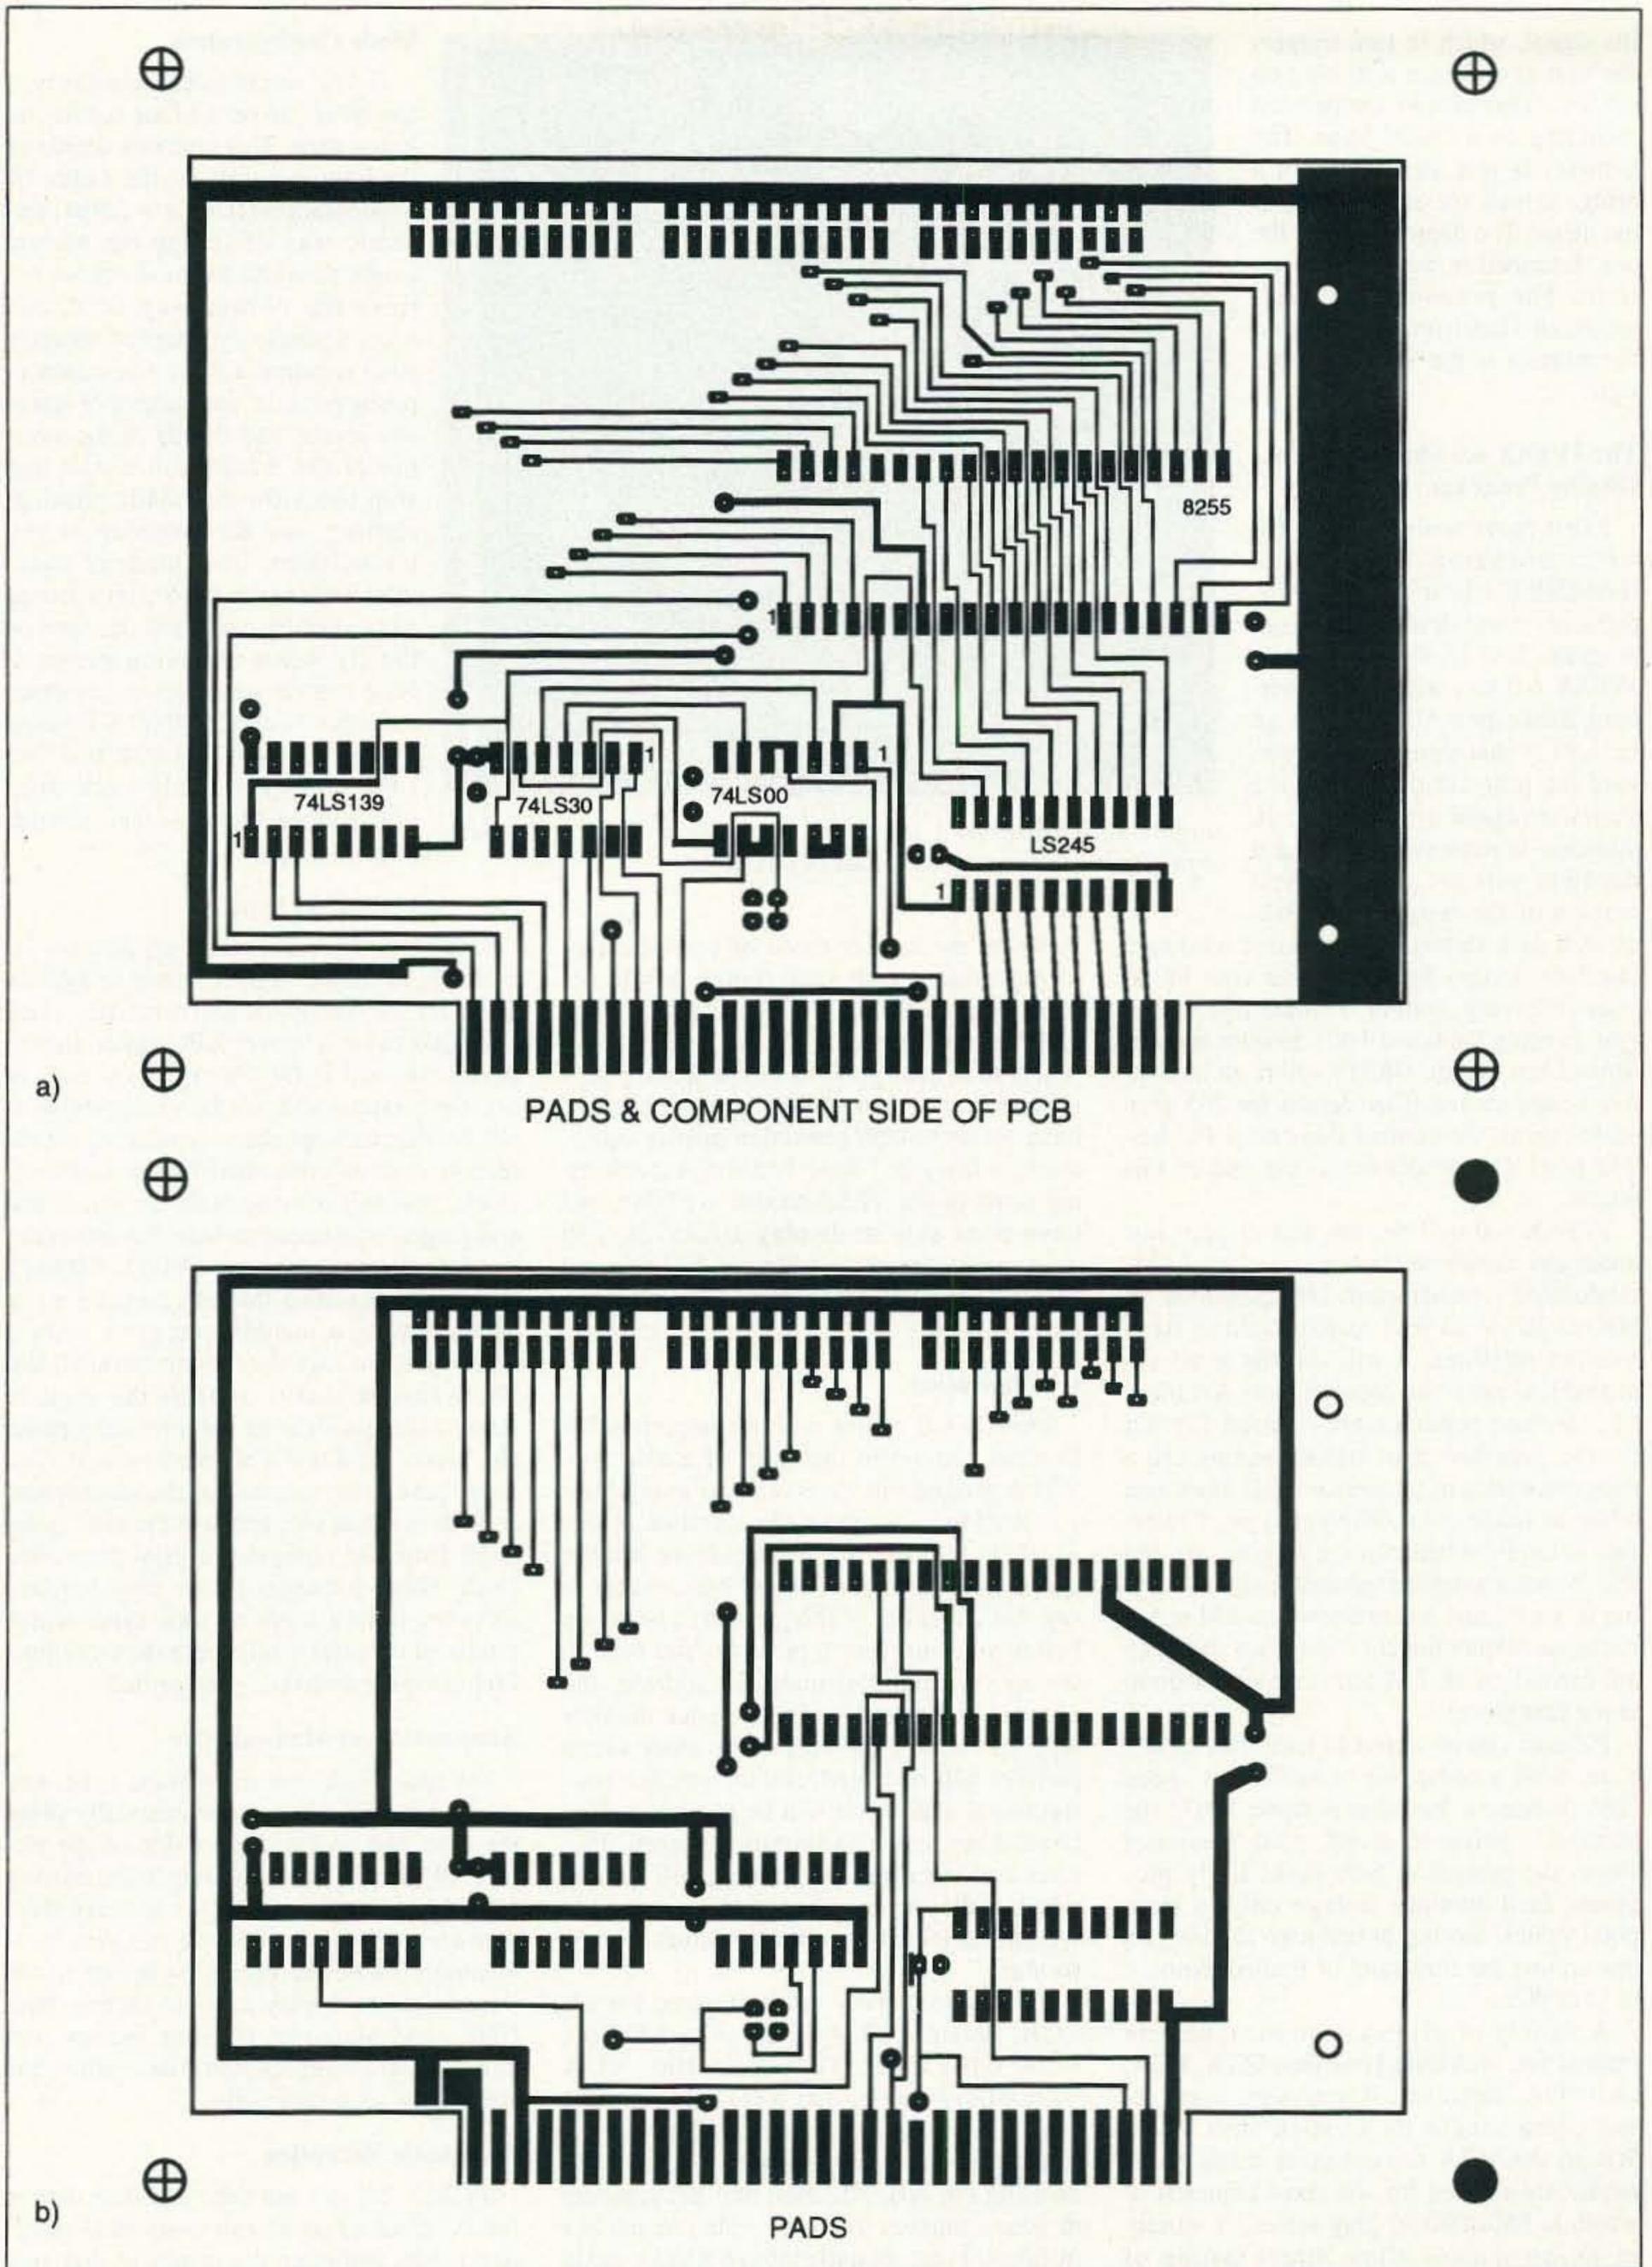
1:1 PCB layout, component side; b) 1:1 PCB layout, solder side.
